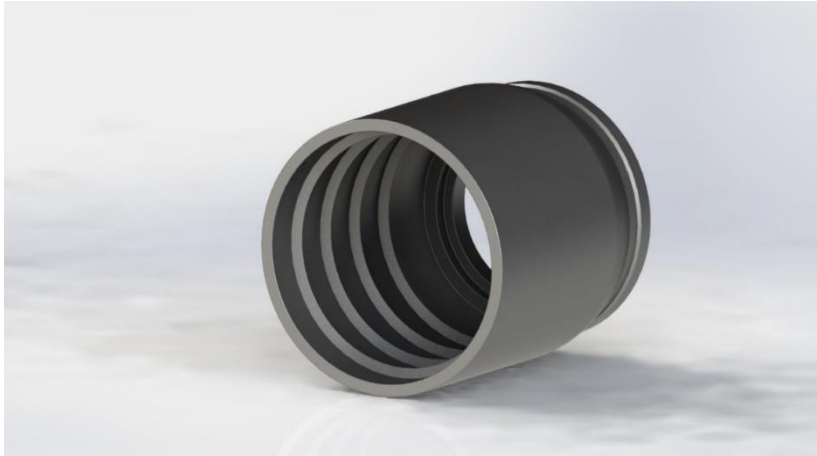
SMSNS-16: CAD Drawing (Final Render)
